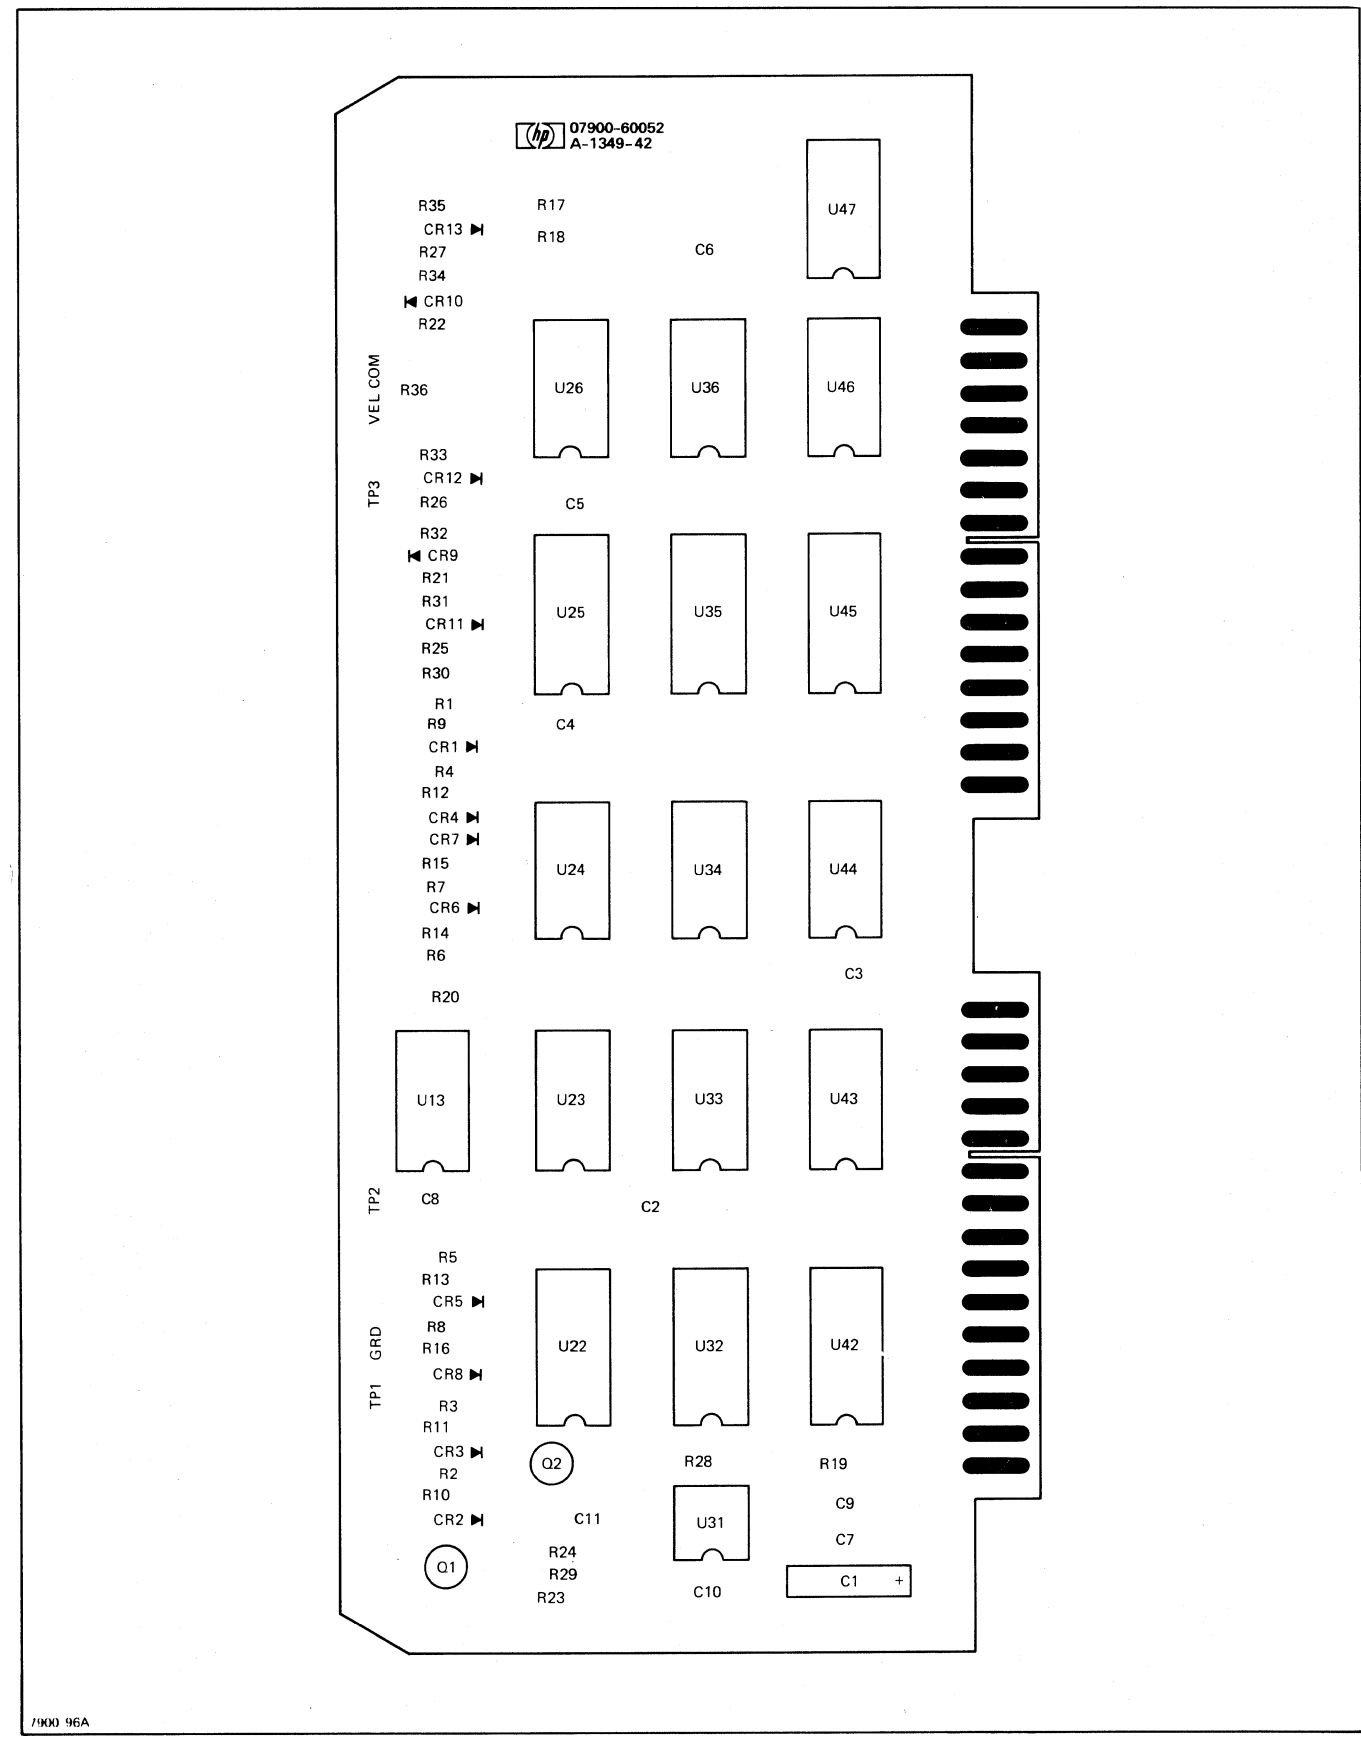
Cylinder Address Assembly A11 Parts Location Diagram
